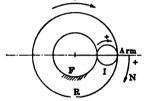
Same train as Fig. 8 but with the internal gear driving.
